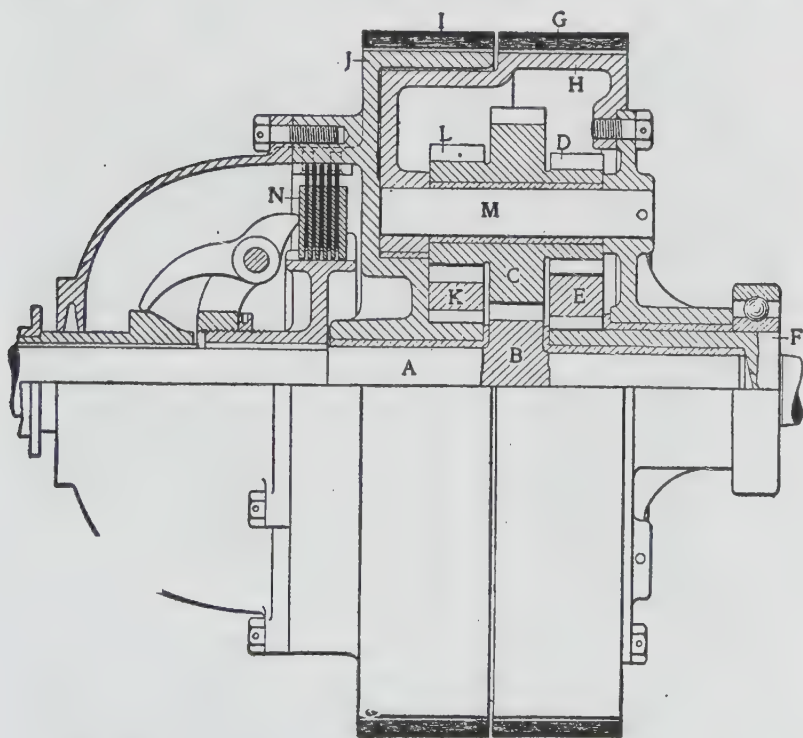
ASSEMBLY OF "ALL-SPUR" TYPE OF PLANETARY GEAR SET.
